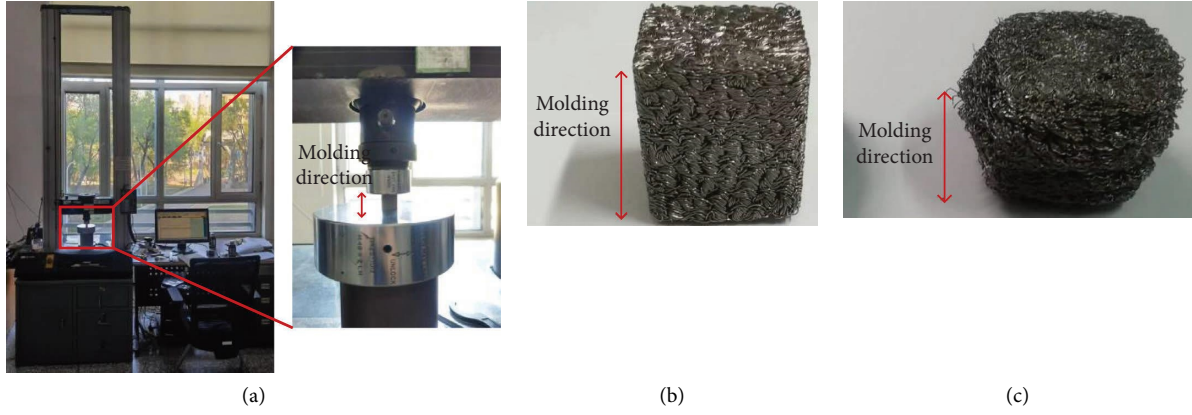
Metal rubber and test machine: (a) testing machine; (b) metal rubber specimen before testing; (c) metal rubber specimen after testing.
